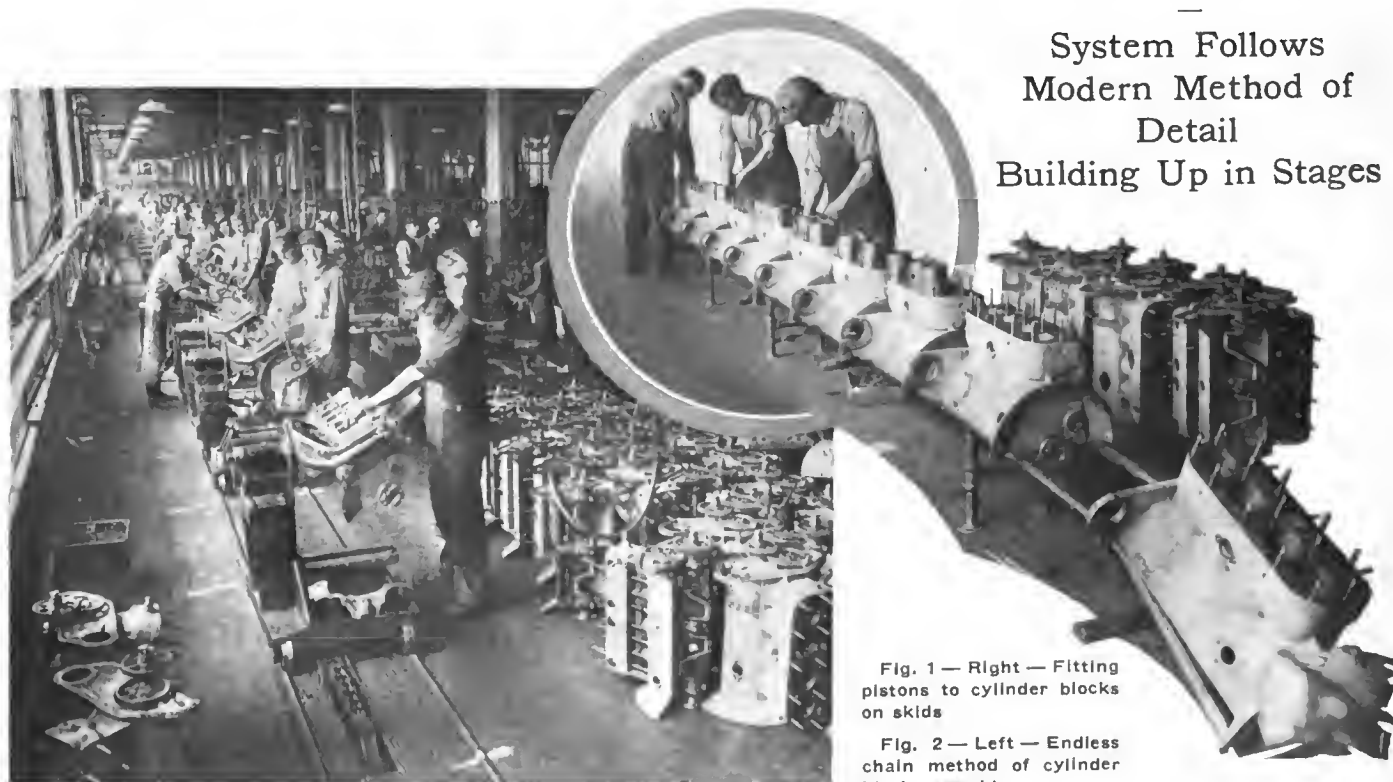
Right — Fitting pistons to cylinder blocks on skids
